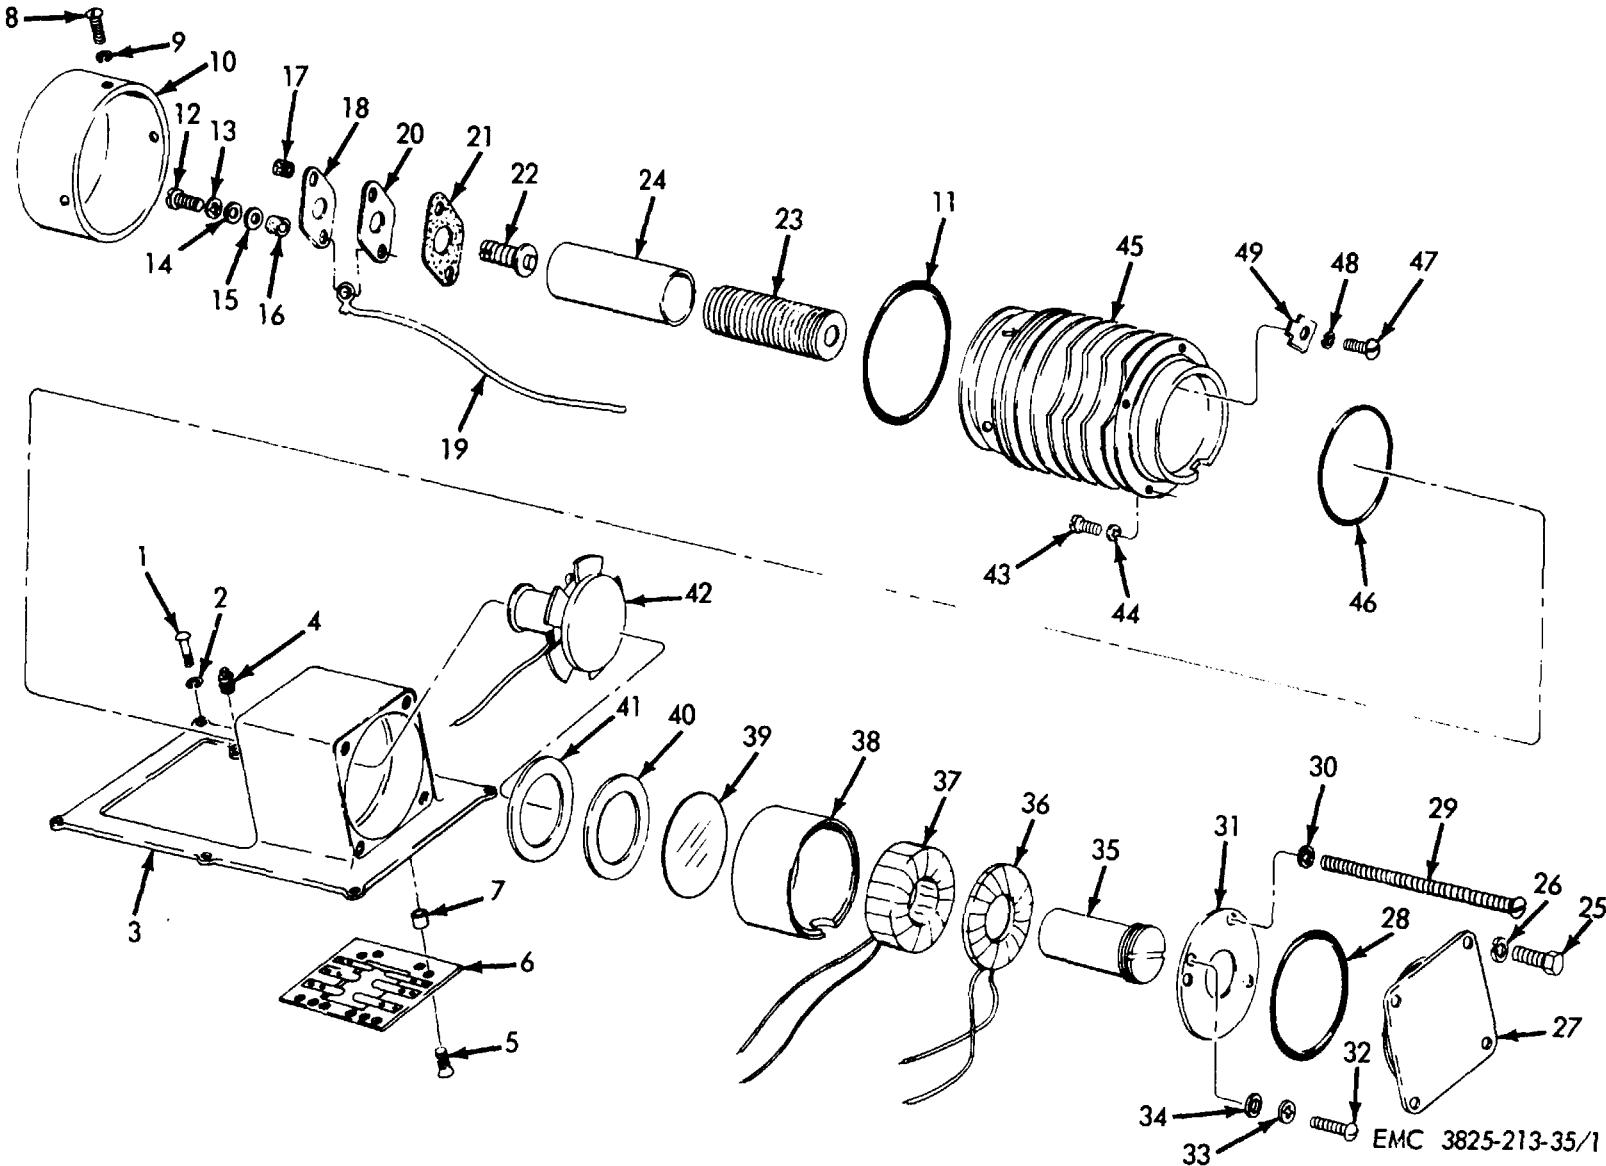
Generator voltage regulator cover assembly, disassembly and reassembly, exploded view.
